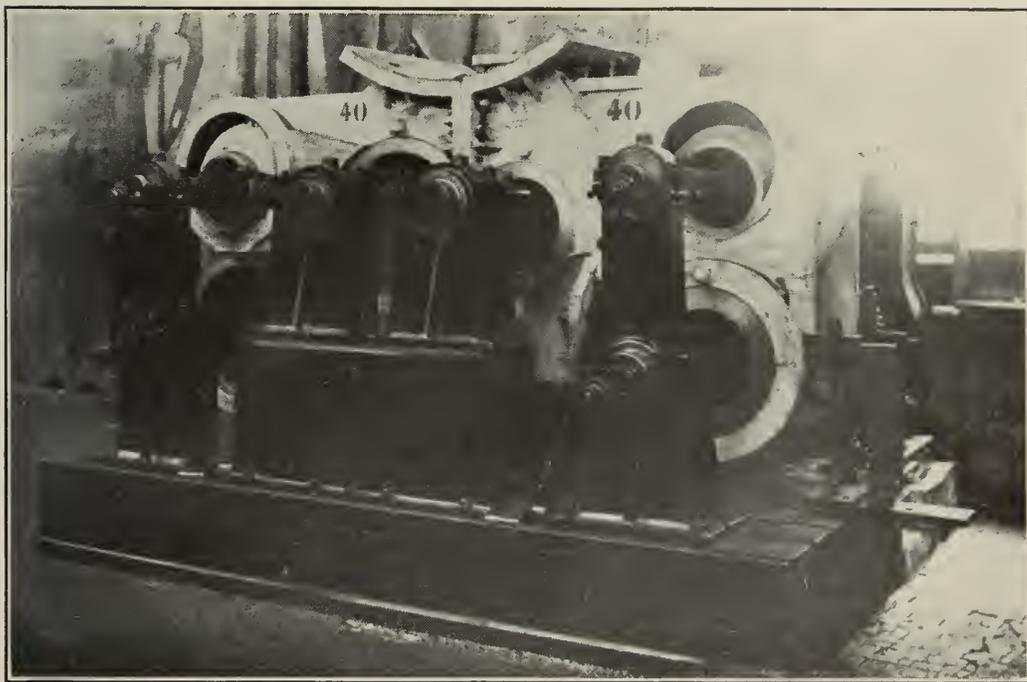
SIX-SPINDLE CYLINDER BORER AT WORK.
